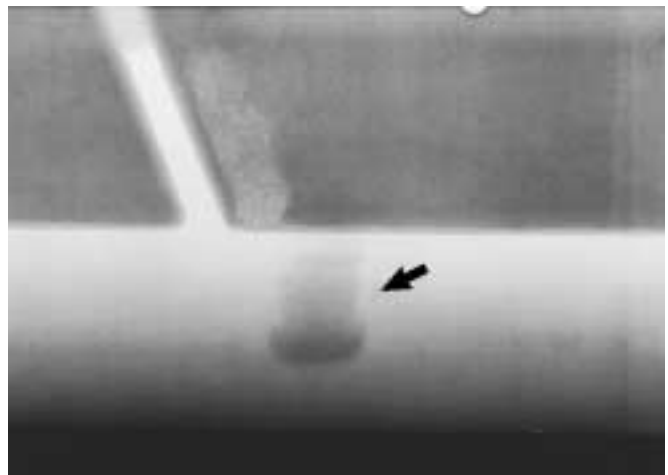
Sponge shrinkage in 13 mm (0.5 in.) aluminum casting.
